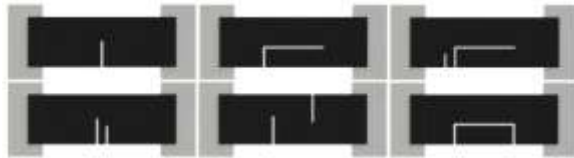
Strain cut, L-cut, Vernier cut, Double cut, Double reverse cut, U-cut
